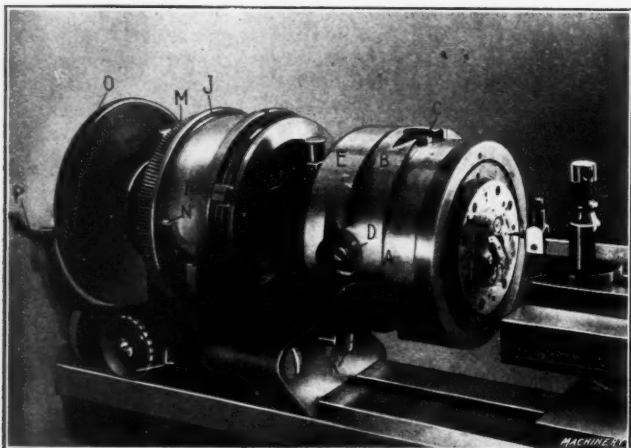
Transfer Chuck used in making Master Plates and Model Watch
